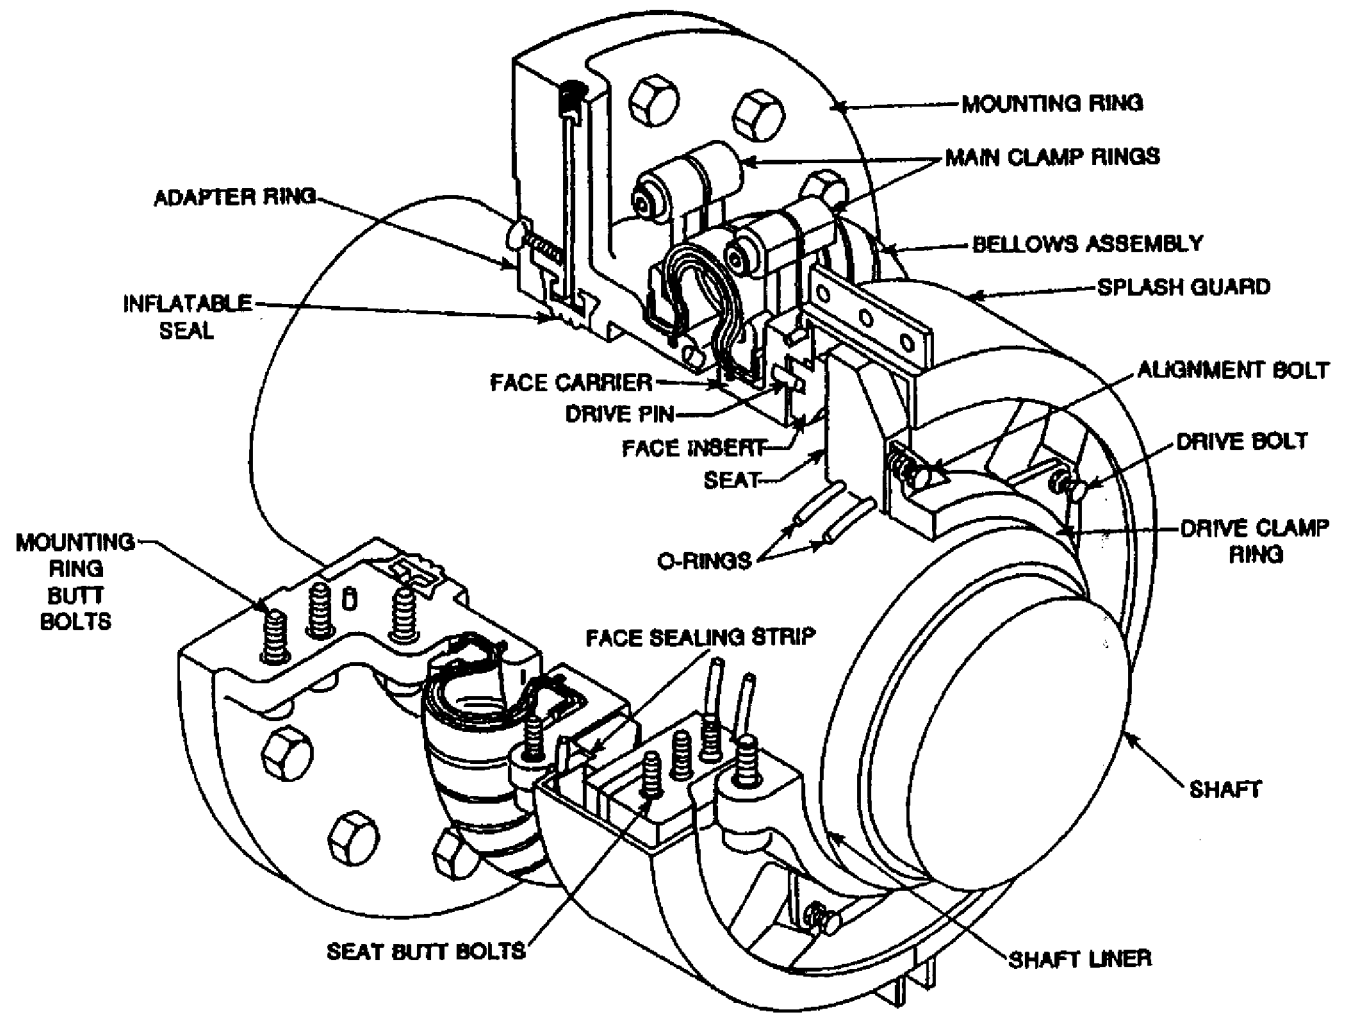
Crane Type MX9 Stern Tube Shaft Seal
